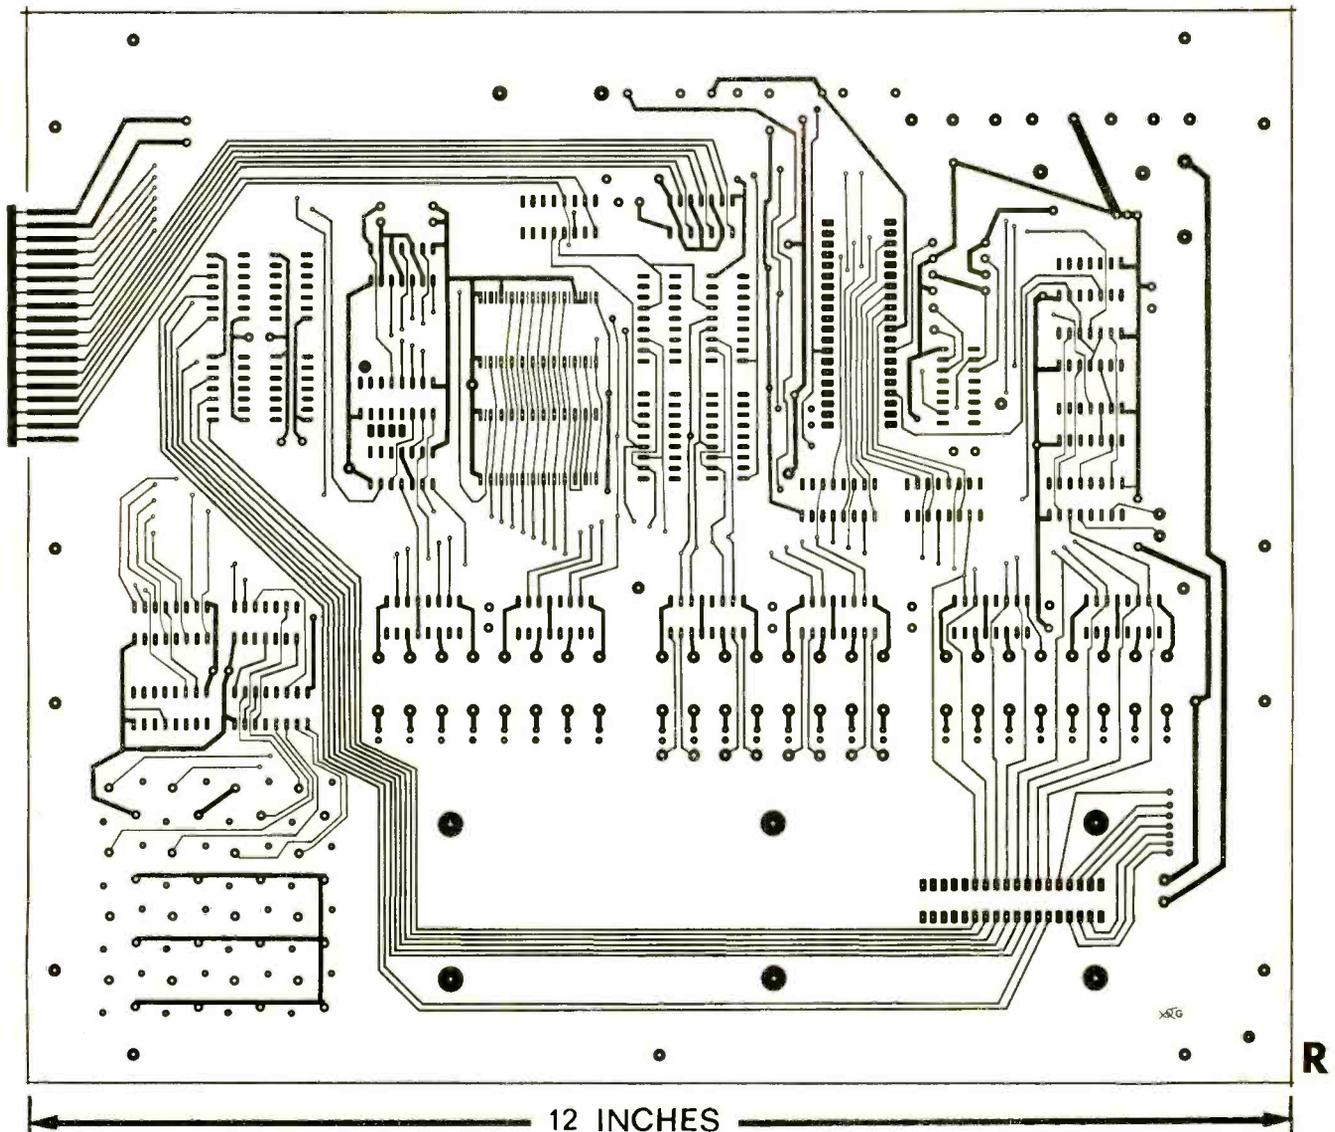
FOIL PATTERN of the bottom of the double-sided board. A board with plated-through holes is recommended.
